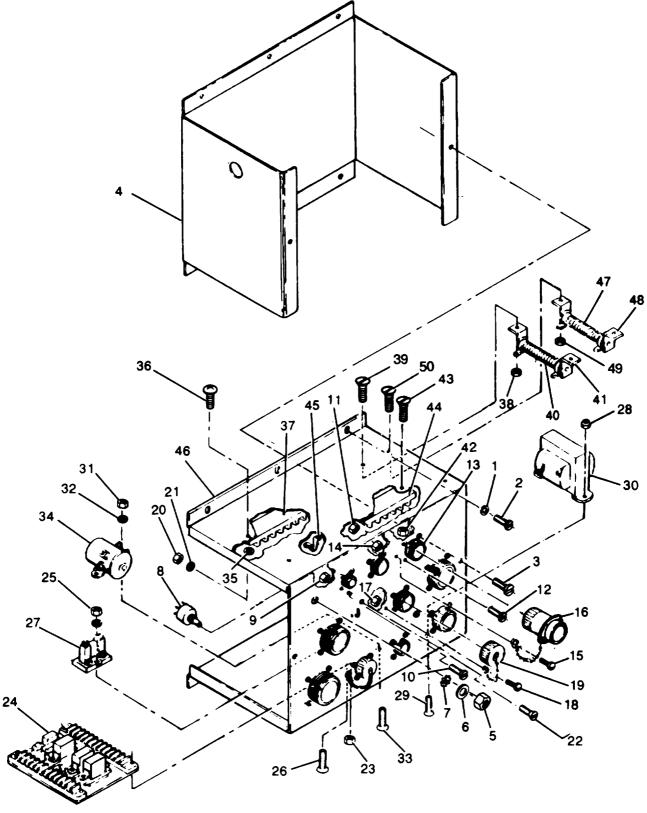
Special Relay Assembly, Exploded View (Sheet 1 of 2)
